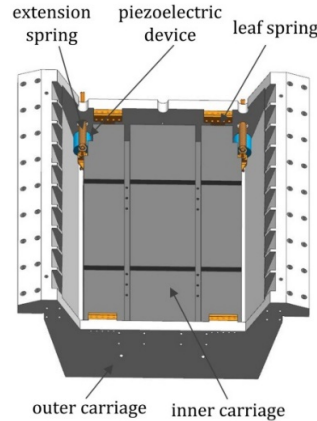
Schematic diagram of blank carriage of CIOMP-6 ruling engine.
